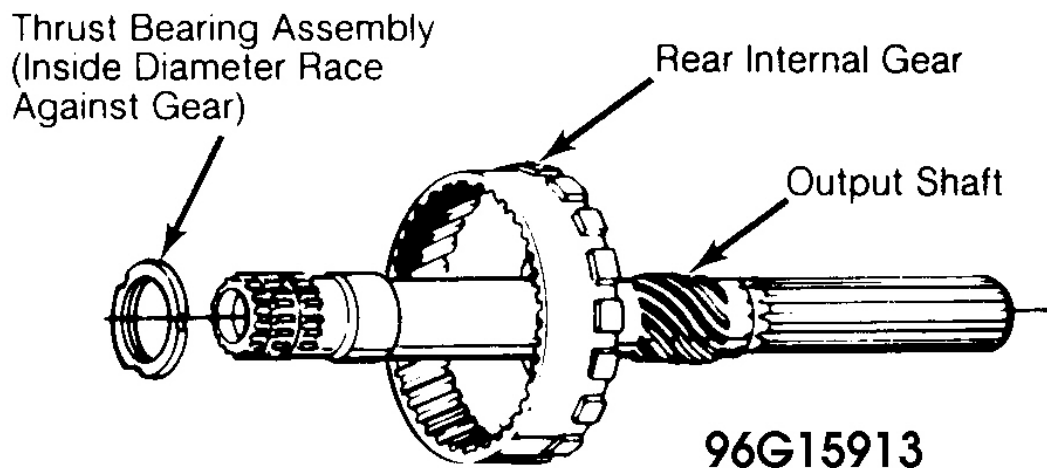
Installing Rear Internal Gear & Thrust Bearing
